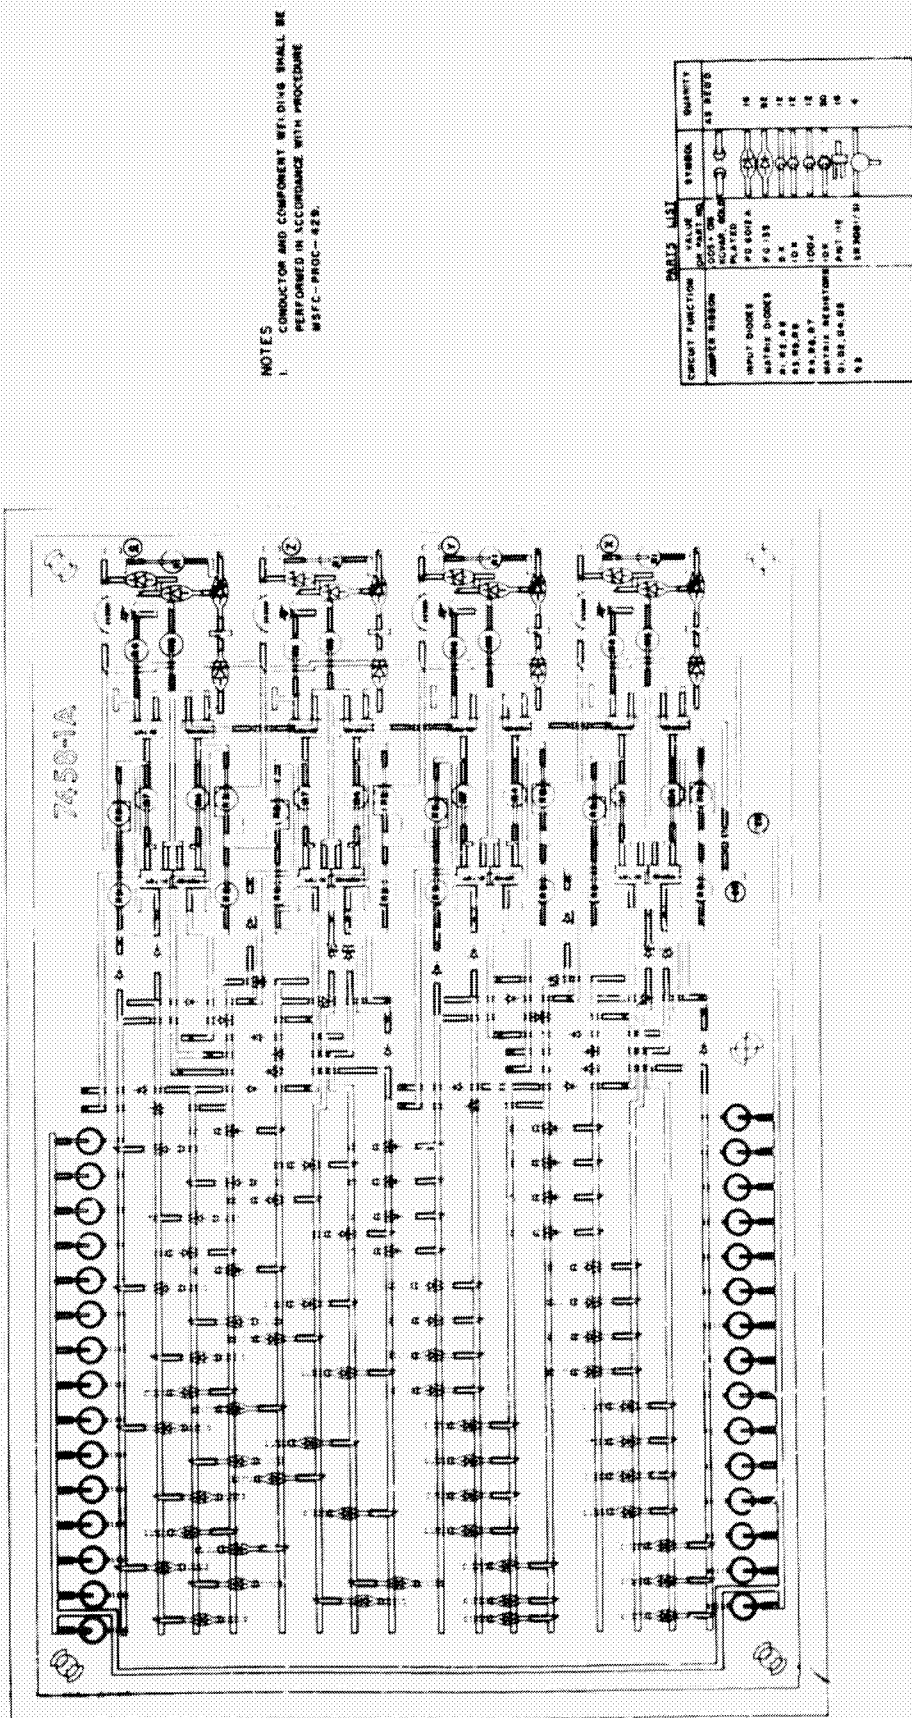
Flight control computer circuit assembly drawing, sheet 1 of 2.
